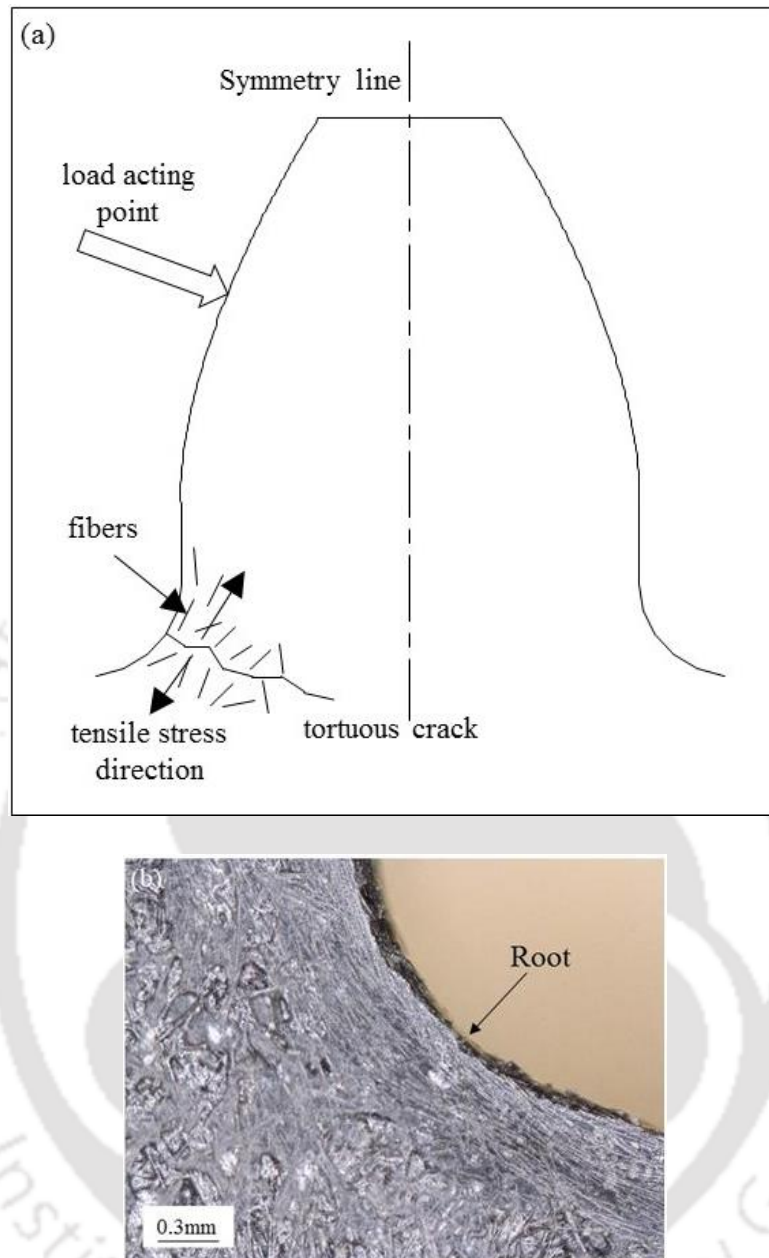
Schematic sketch showing crack direction in PA gear
